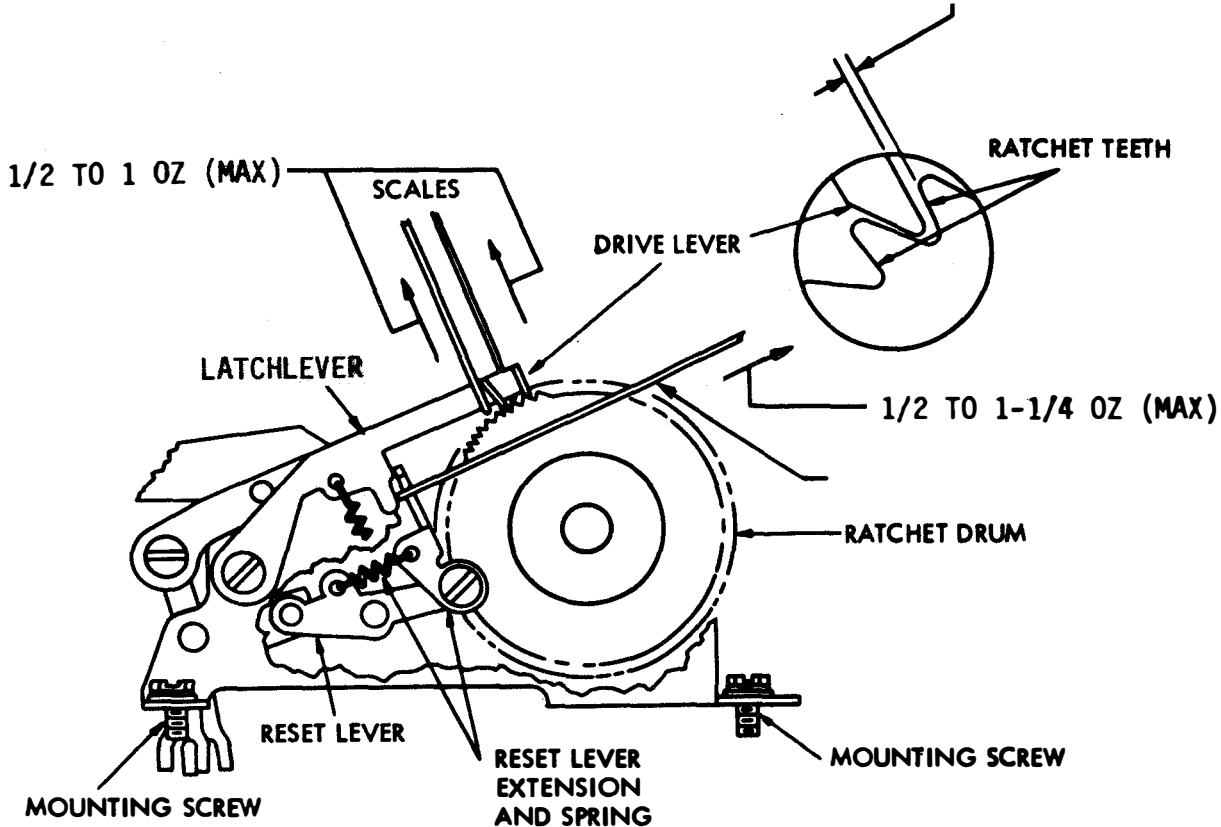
Character Counter Storke, Reset Lever Extension Spring, and Latchlever and Drive Spring
